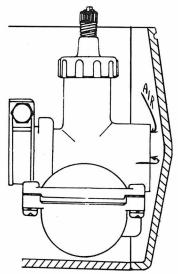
It may be necessary to modify carburetor cover or space cover out to prevent restriction of air to carburetor.
